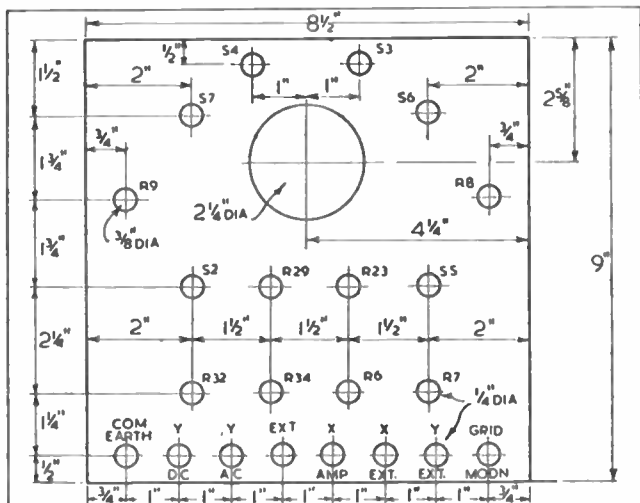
FRONT PANEL LAYOUT OF THE OSCILLOSCOPE
